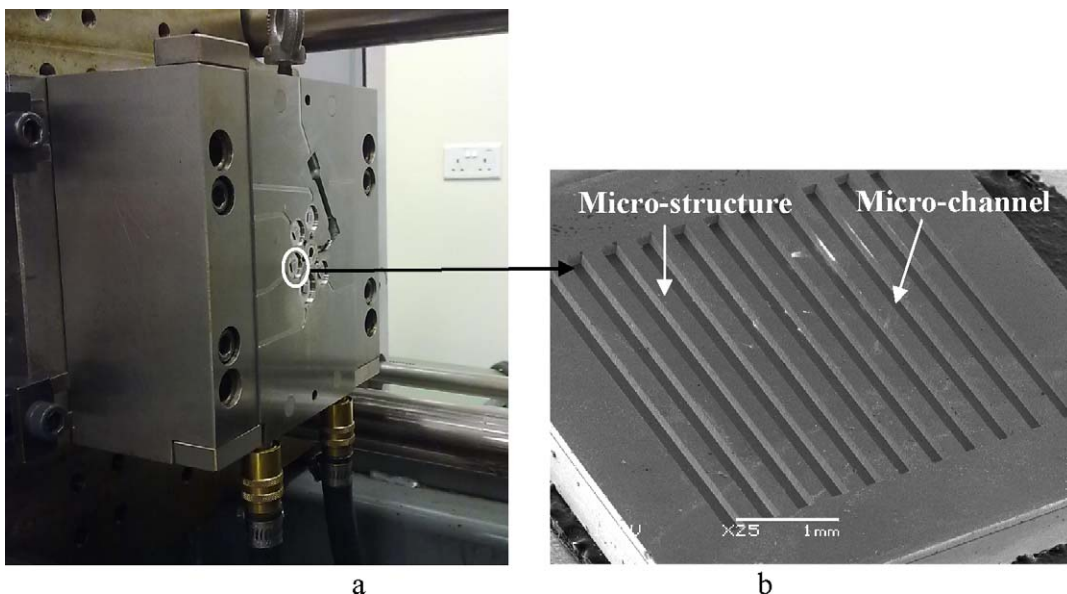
(a) Photograph of the injection moulding machine and (b) SEM micrograph of the silicon mould insert.
